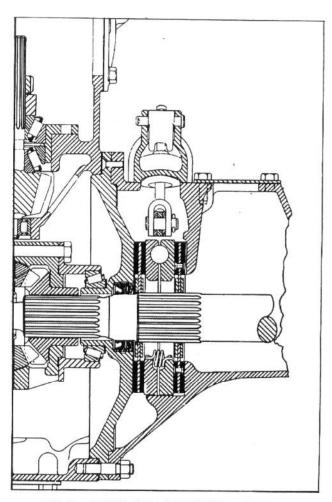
DRIVE AXLE ASSEMBLY — PARTIAL CROSS SECTION (W/O DIFF. LOCK)
